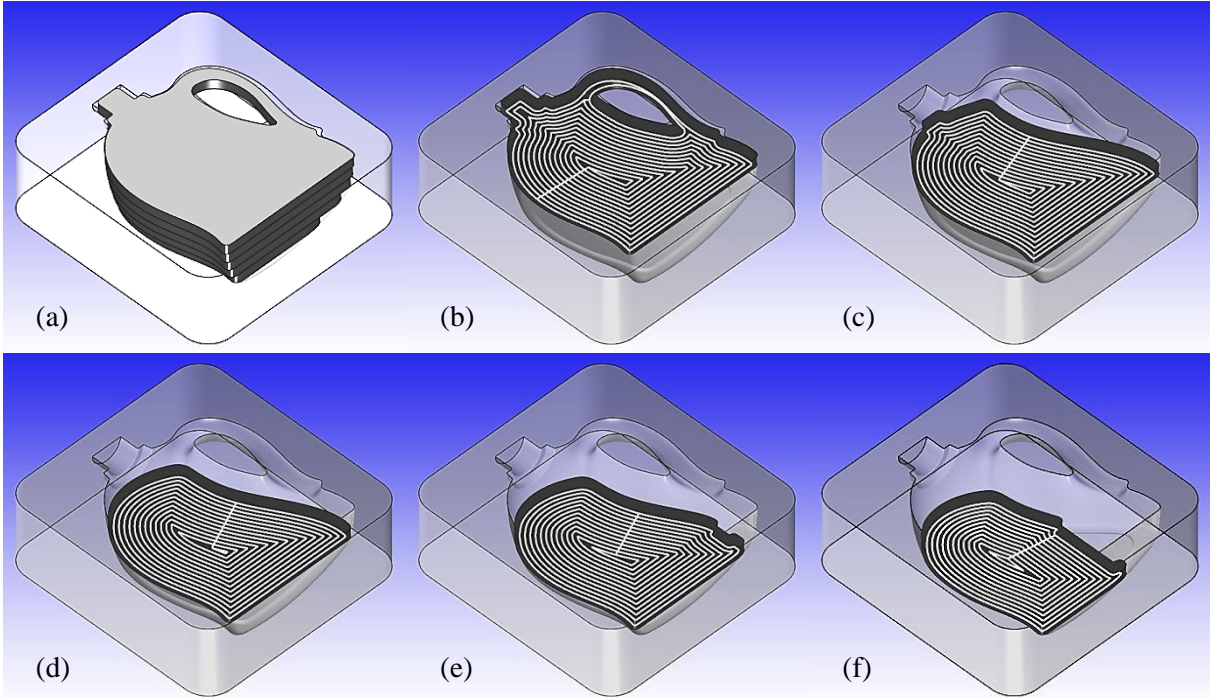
An example of using only one small tool to machine the entire cavity. Tool path is represented by white contours. (a) Tool accessible volume. (b) First machining layer.(c) Second machining layer. (d) Third machining layer. (e) Fourth machining layer. (f) Fifth machining layer.
